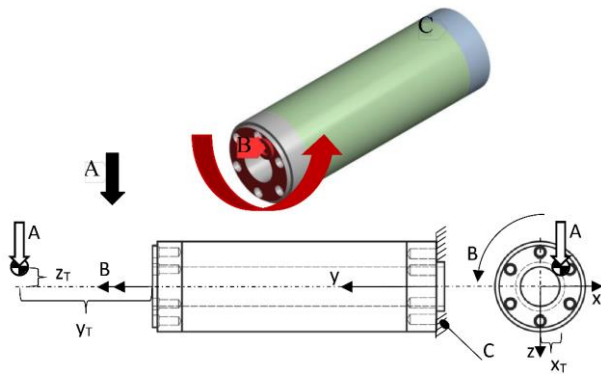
A – load force 39 N; B – torque 1.5 N m; C – fixed support condition.
